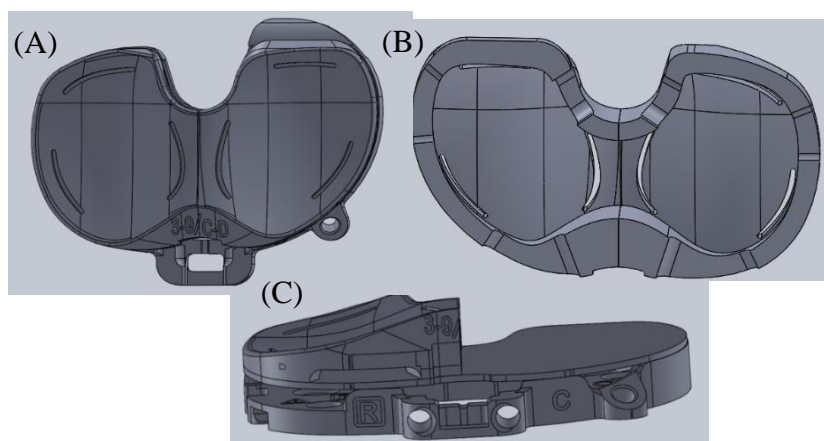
Third Design a) Top View b) Bottom View c) Front View
